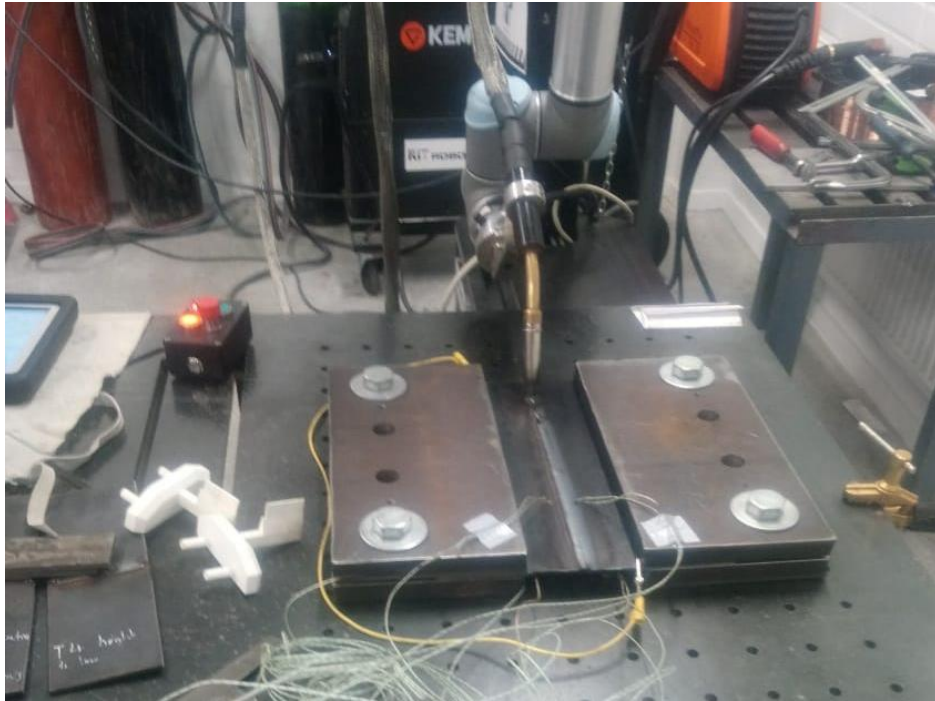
Example of a welding setup with the thermocouples installed in the plates without probes.
